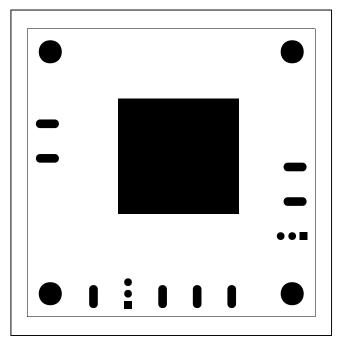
MAX17506 3.3V Output EV Kit Component Placement Guide—Bottom Solder Mask
